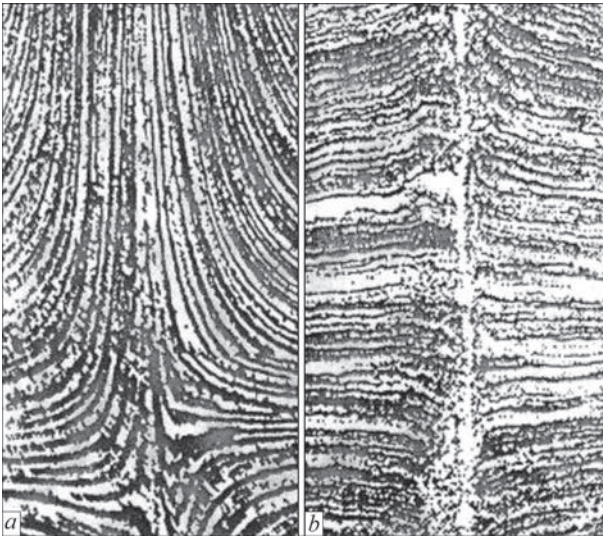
Macrostructure of flash-butt welded joints of pipe steel: *a* — welding without flashing; *b* — welding with flashing [15]
